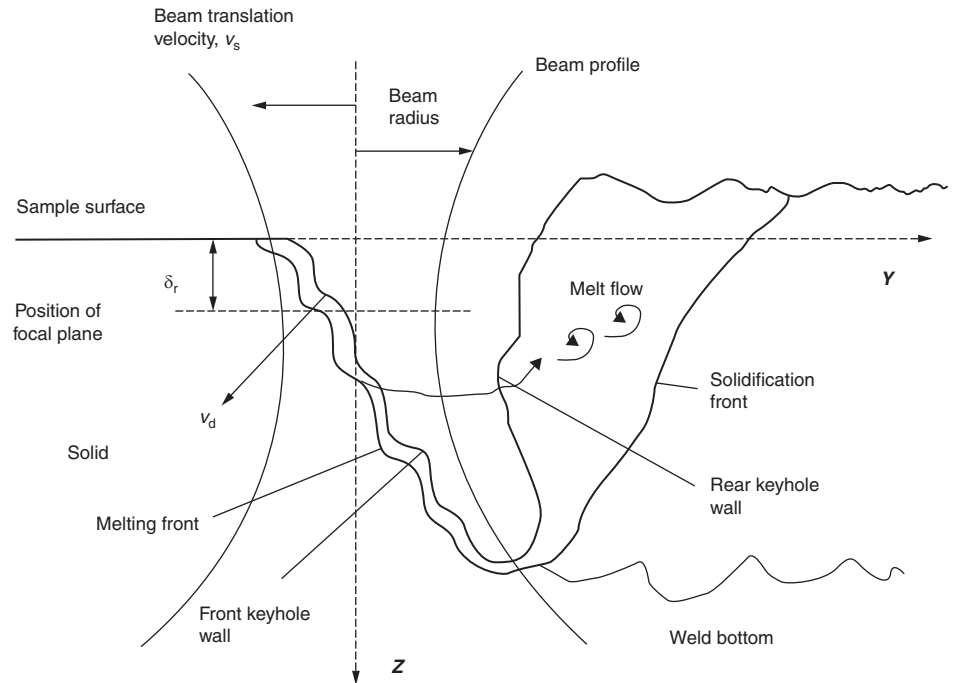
Cross section of weld pool. Source: Ref 14
